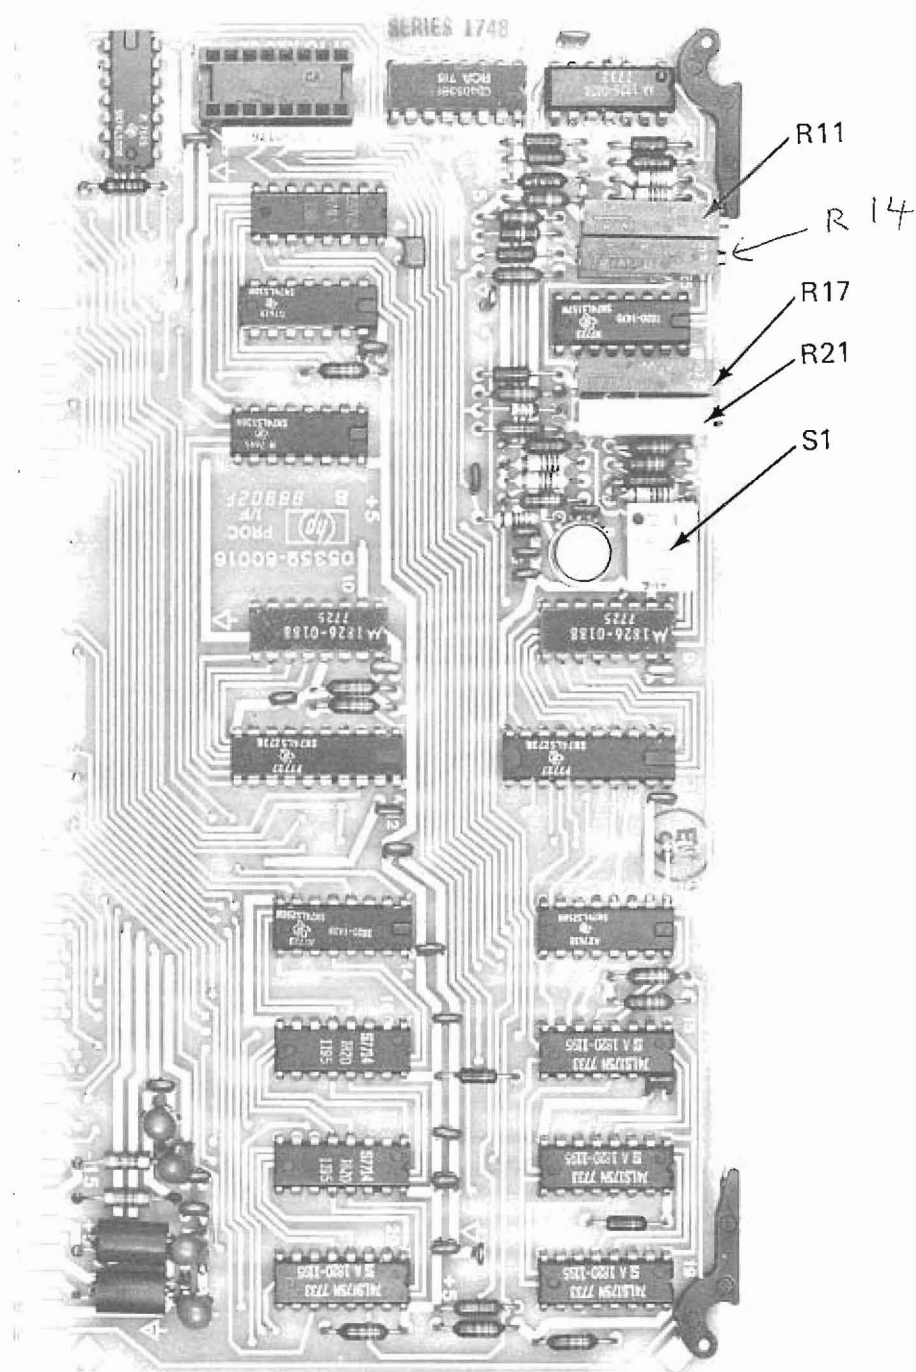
A16 Processor Interface Assembly Adjustments (Continued)
